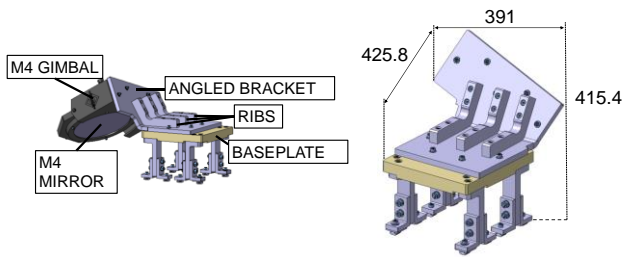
Left: M4 key parts. Right: M4 mounting bracket with dimensions in millimetres.
